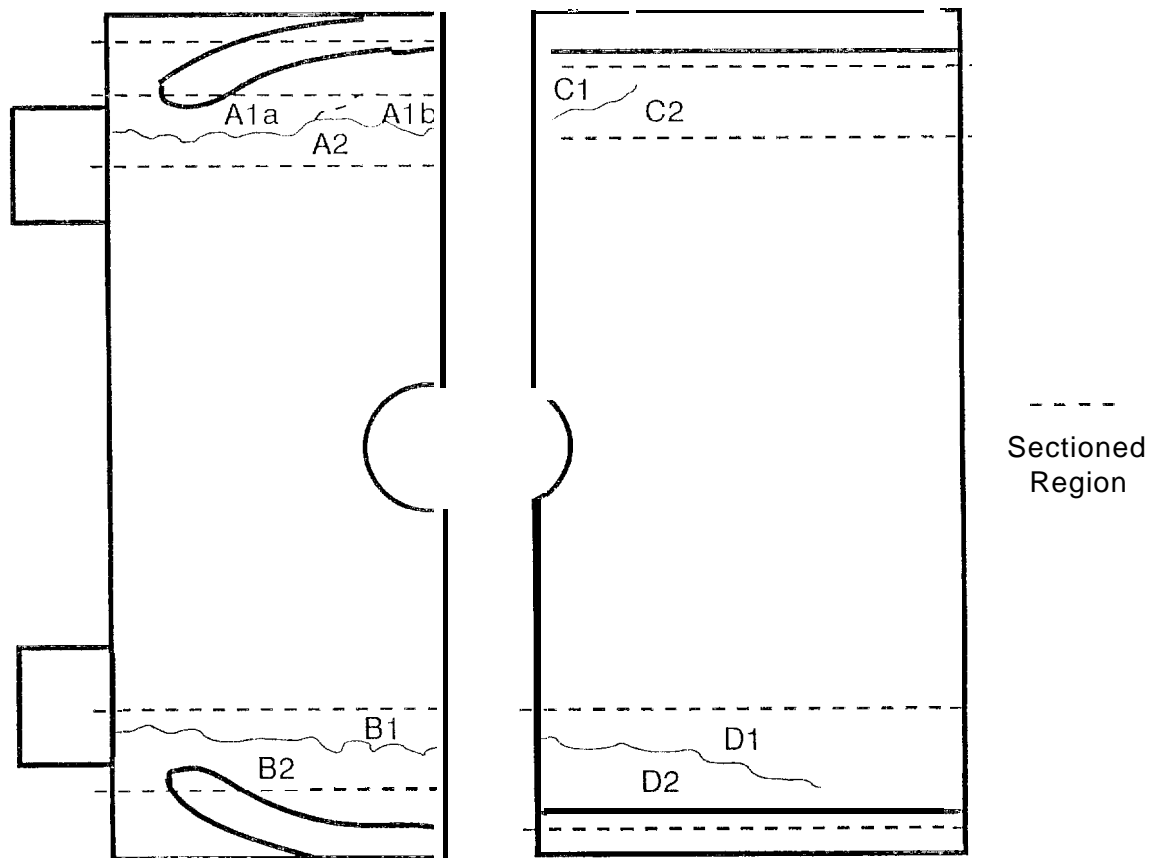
Schematic showing method of sectioning for the fracture surfaces of track shoe #R6.
